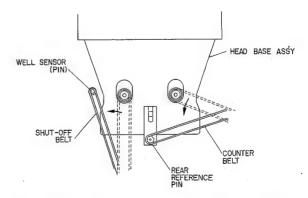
Ball Drive Mechanism Ass'y Replacement
